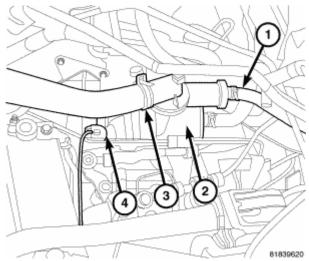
SECONDARY THERMOSTAT Courtesy of CHRYSLER LLC
